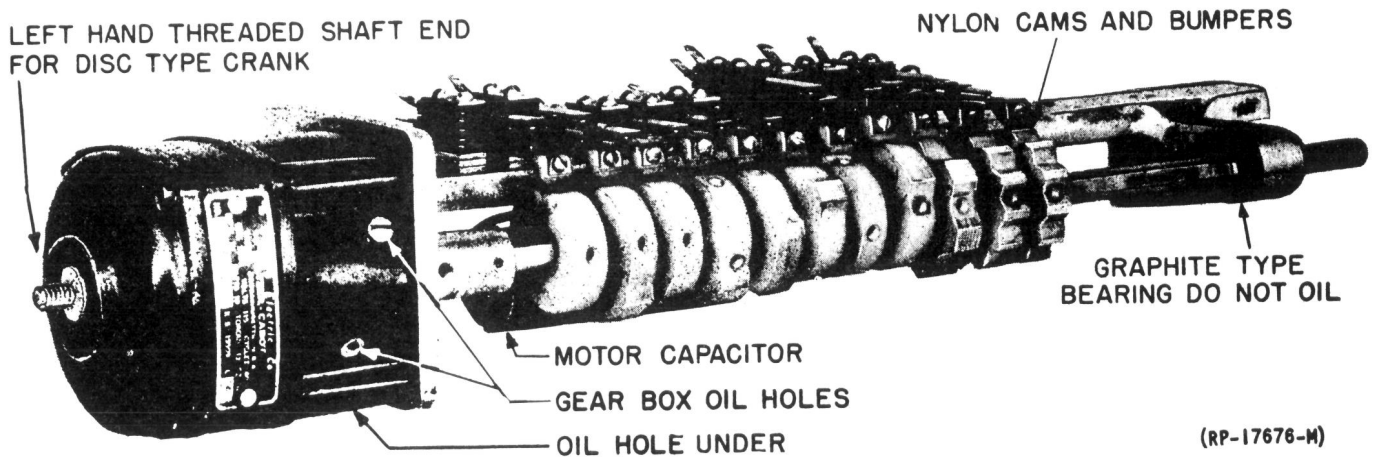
AC Motor Driven Low-Speed Interrupter
